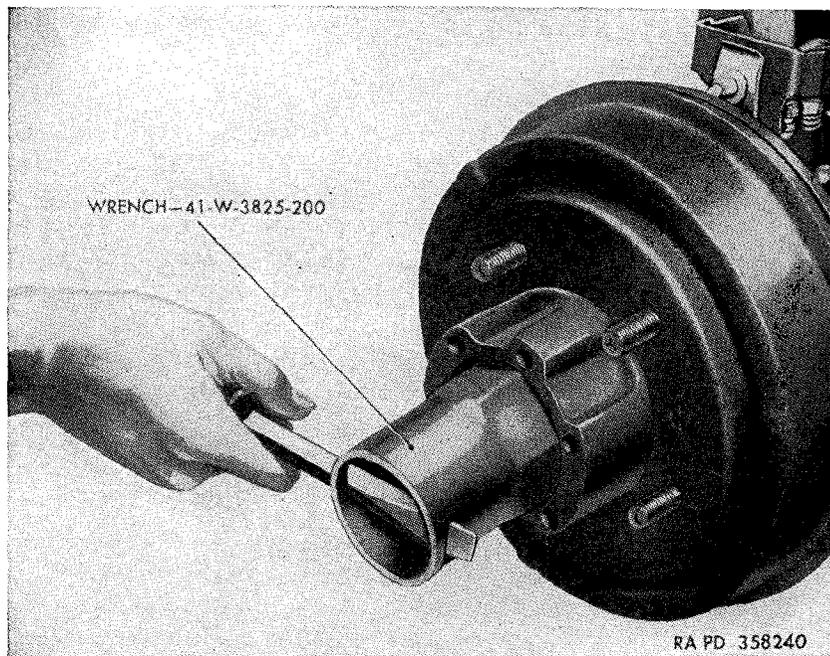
Removing hub bearing jamnut, using wrench—41-W-3825-200.
